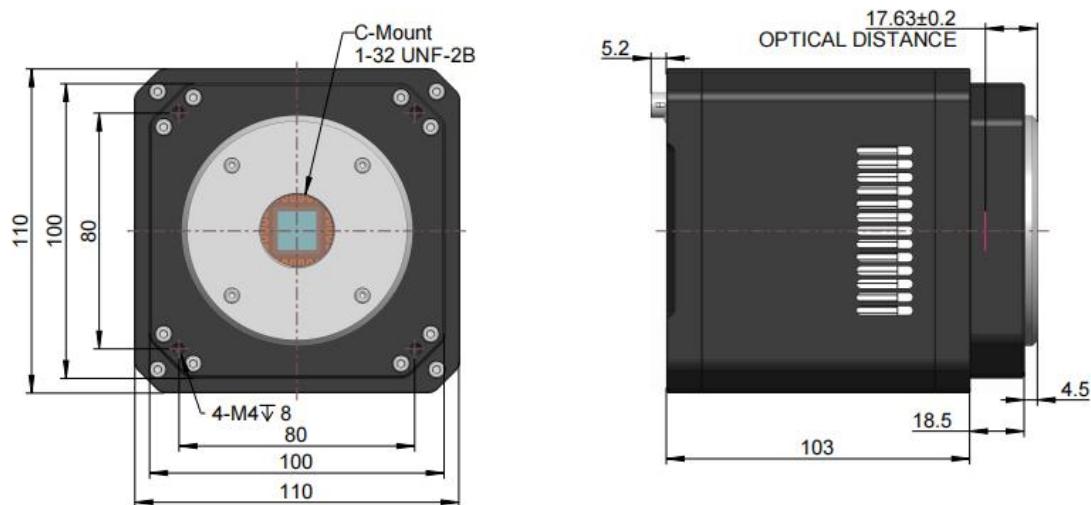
4 MAX04AM& MAX04AM dimensions (mm)
